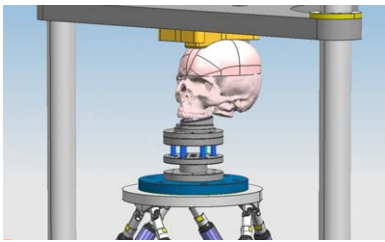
3-D Assembly of the Dento-Munch Robo-Simulator
